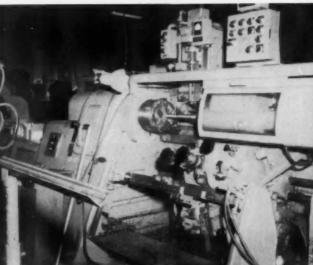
Same lathe appearing in Figs. 2 and 3 but viewed from the tail-stock end. Note chuck for driving work piece.
